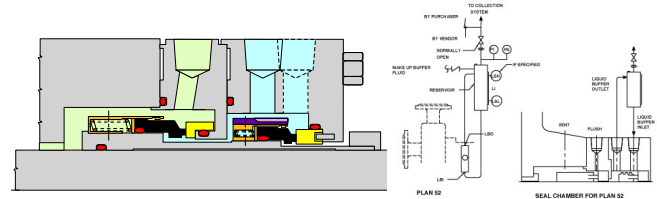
API Arrangement 2 plus Typical Piping Plan.
